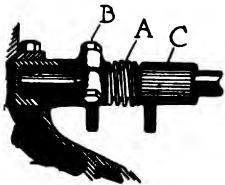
BRAKE ROCKER SHAFT CONSTRUCTION SHOWING A GOOD EXAMPLE OF MEANS FOR TAKING UP RATTLE
